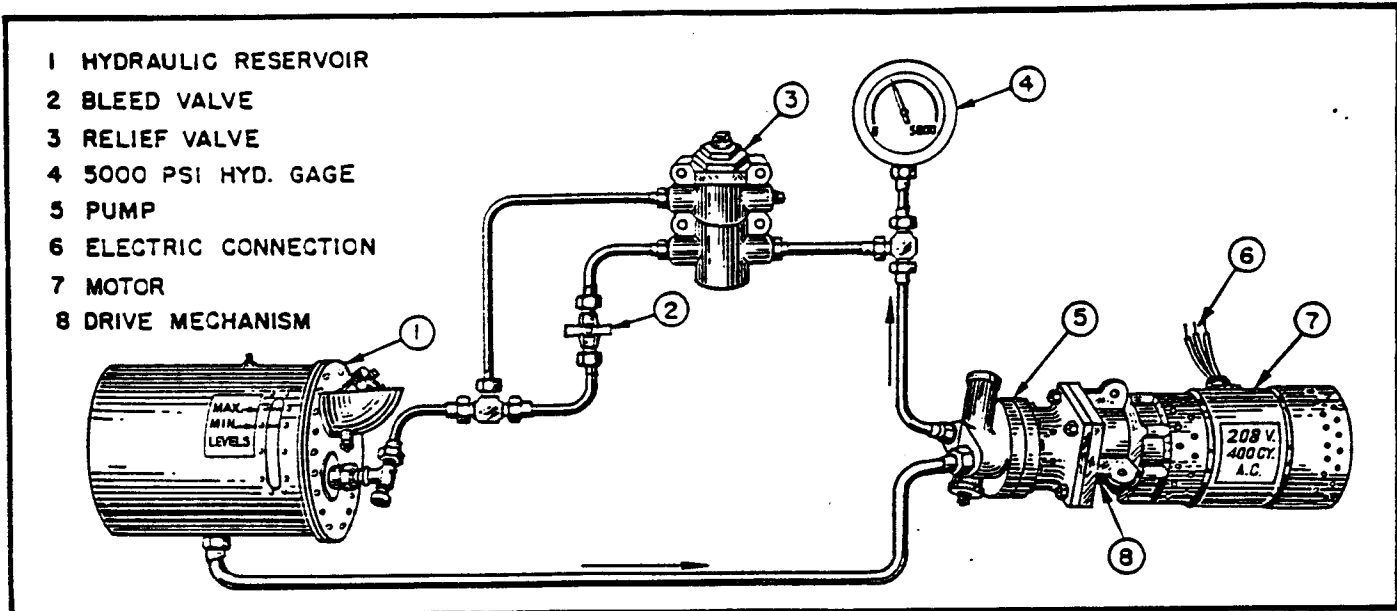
Hydraulic Pump, Gear Box, and Motor Test Set-Up
